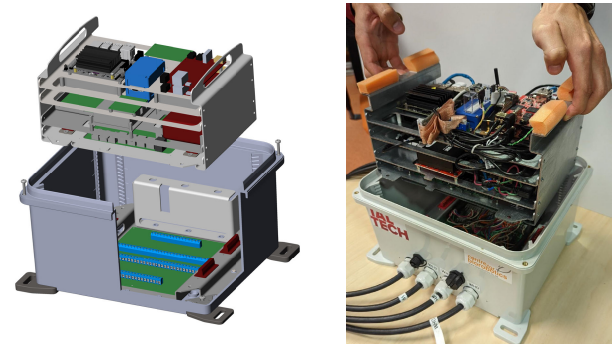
The main electronics compartment. Left: CAD model in section view. Right: physical prototype being assembled.
